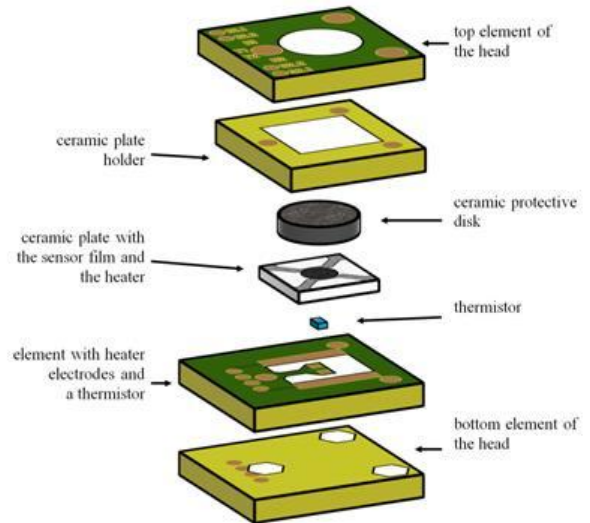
Exploded view of the sensor head (connector and screws not shown).
